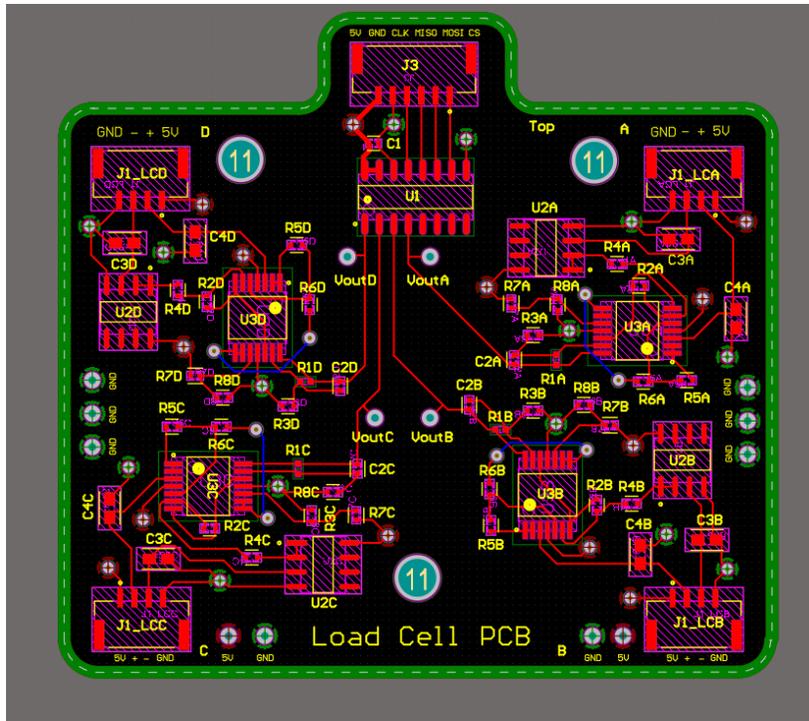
Updated load cell PCB layout (dimension: 63.2mm x 58.2mm).
